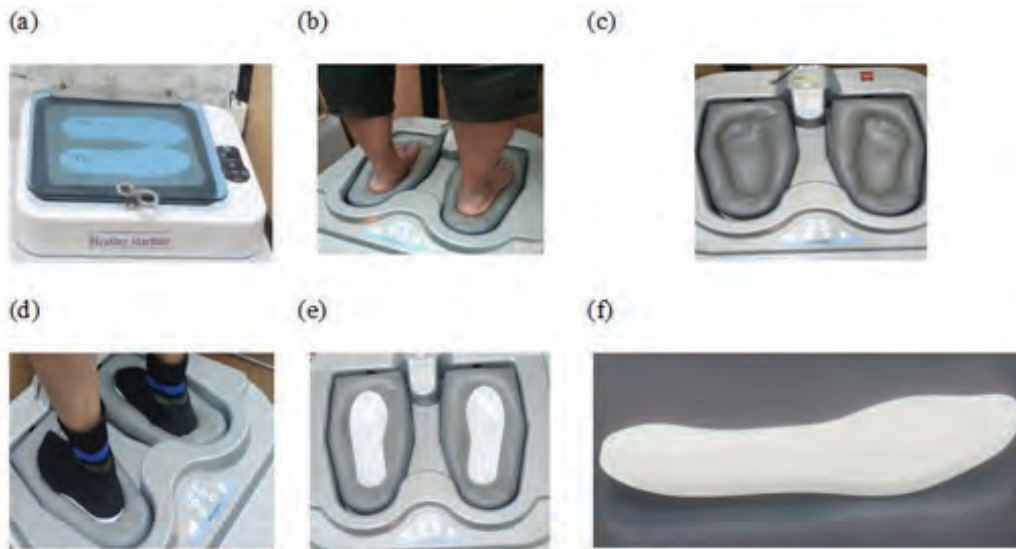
Thermomechanical programming of 4D printed SMTPU insole: (a) heating above T_g , (b) conforming foot profile using imprinter, (c) mold creation, (d) thermo-compressive loading, (e) insole programmed, conforming foot profile and, (f) shape fixing according to foot profile
